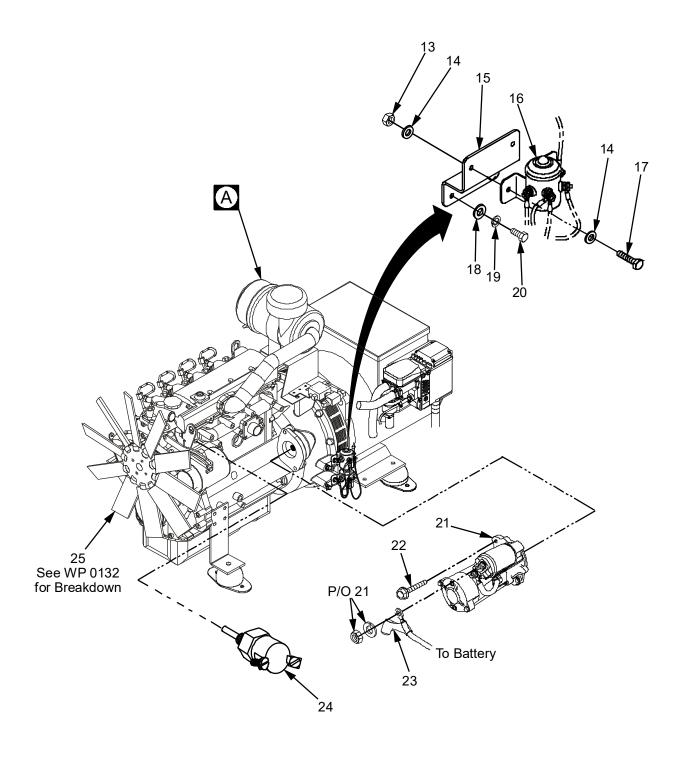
Engine-Generator Assembly 1013012 (Sheet 2 of 7).
